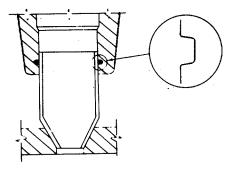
Installing Injector Sleeve O-Ring.
